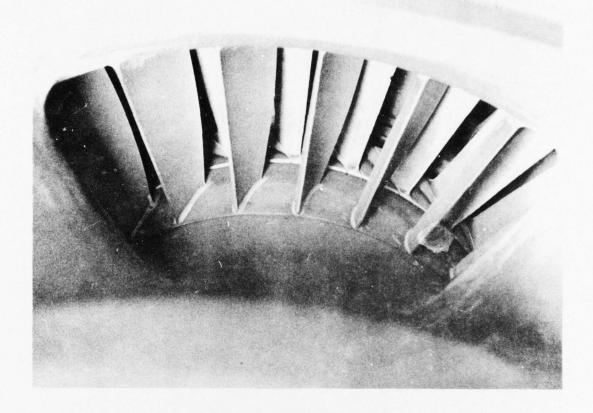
Inlet guide vanes and first-stage rotor blade after 5.6 hours' sand exposure. Note slight FOD on blade and the smooth, more even surface of the vanes.
